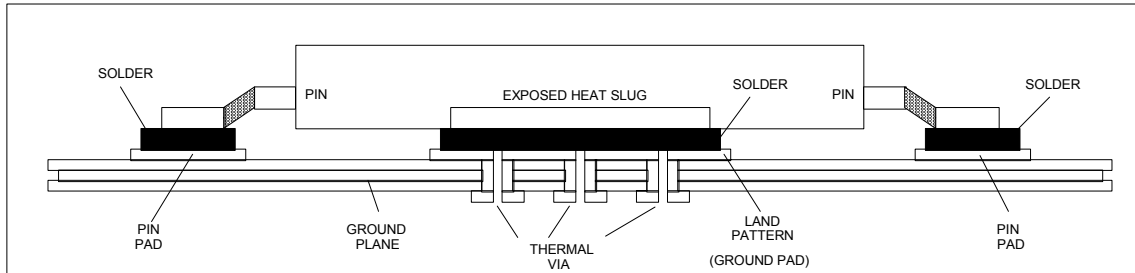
Assembly for Expose Pad thermal Release Path (Side View)
